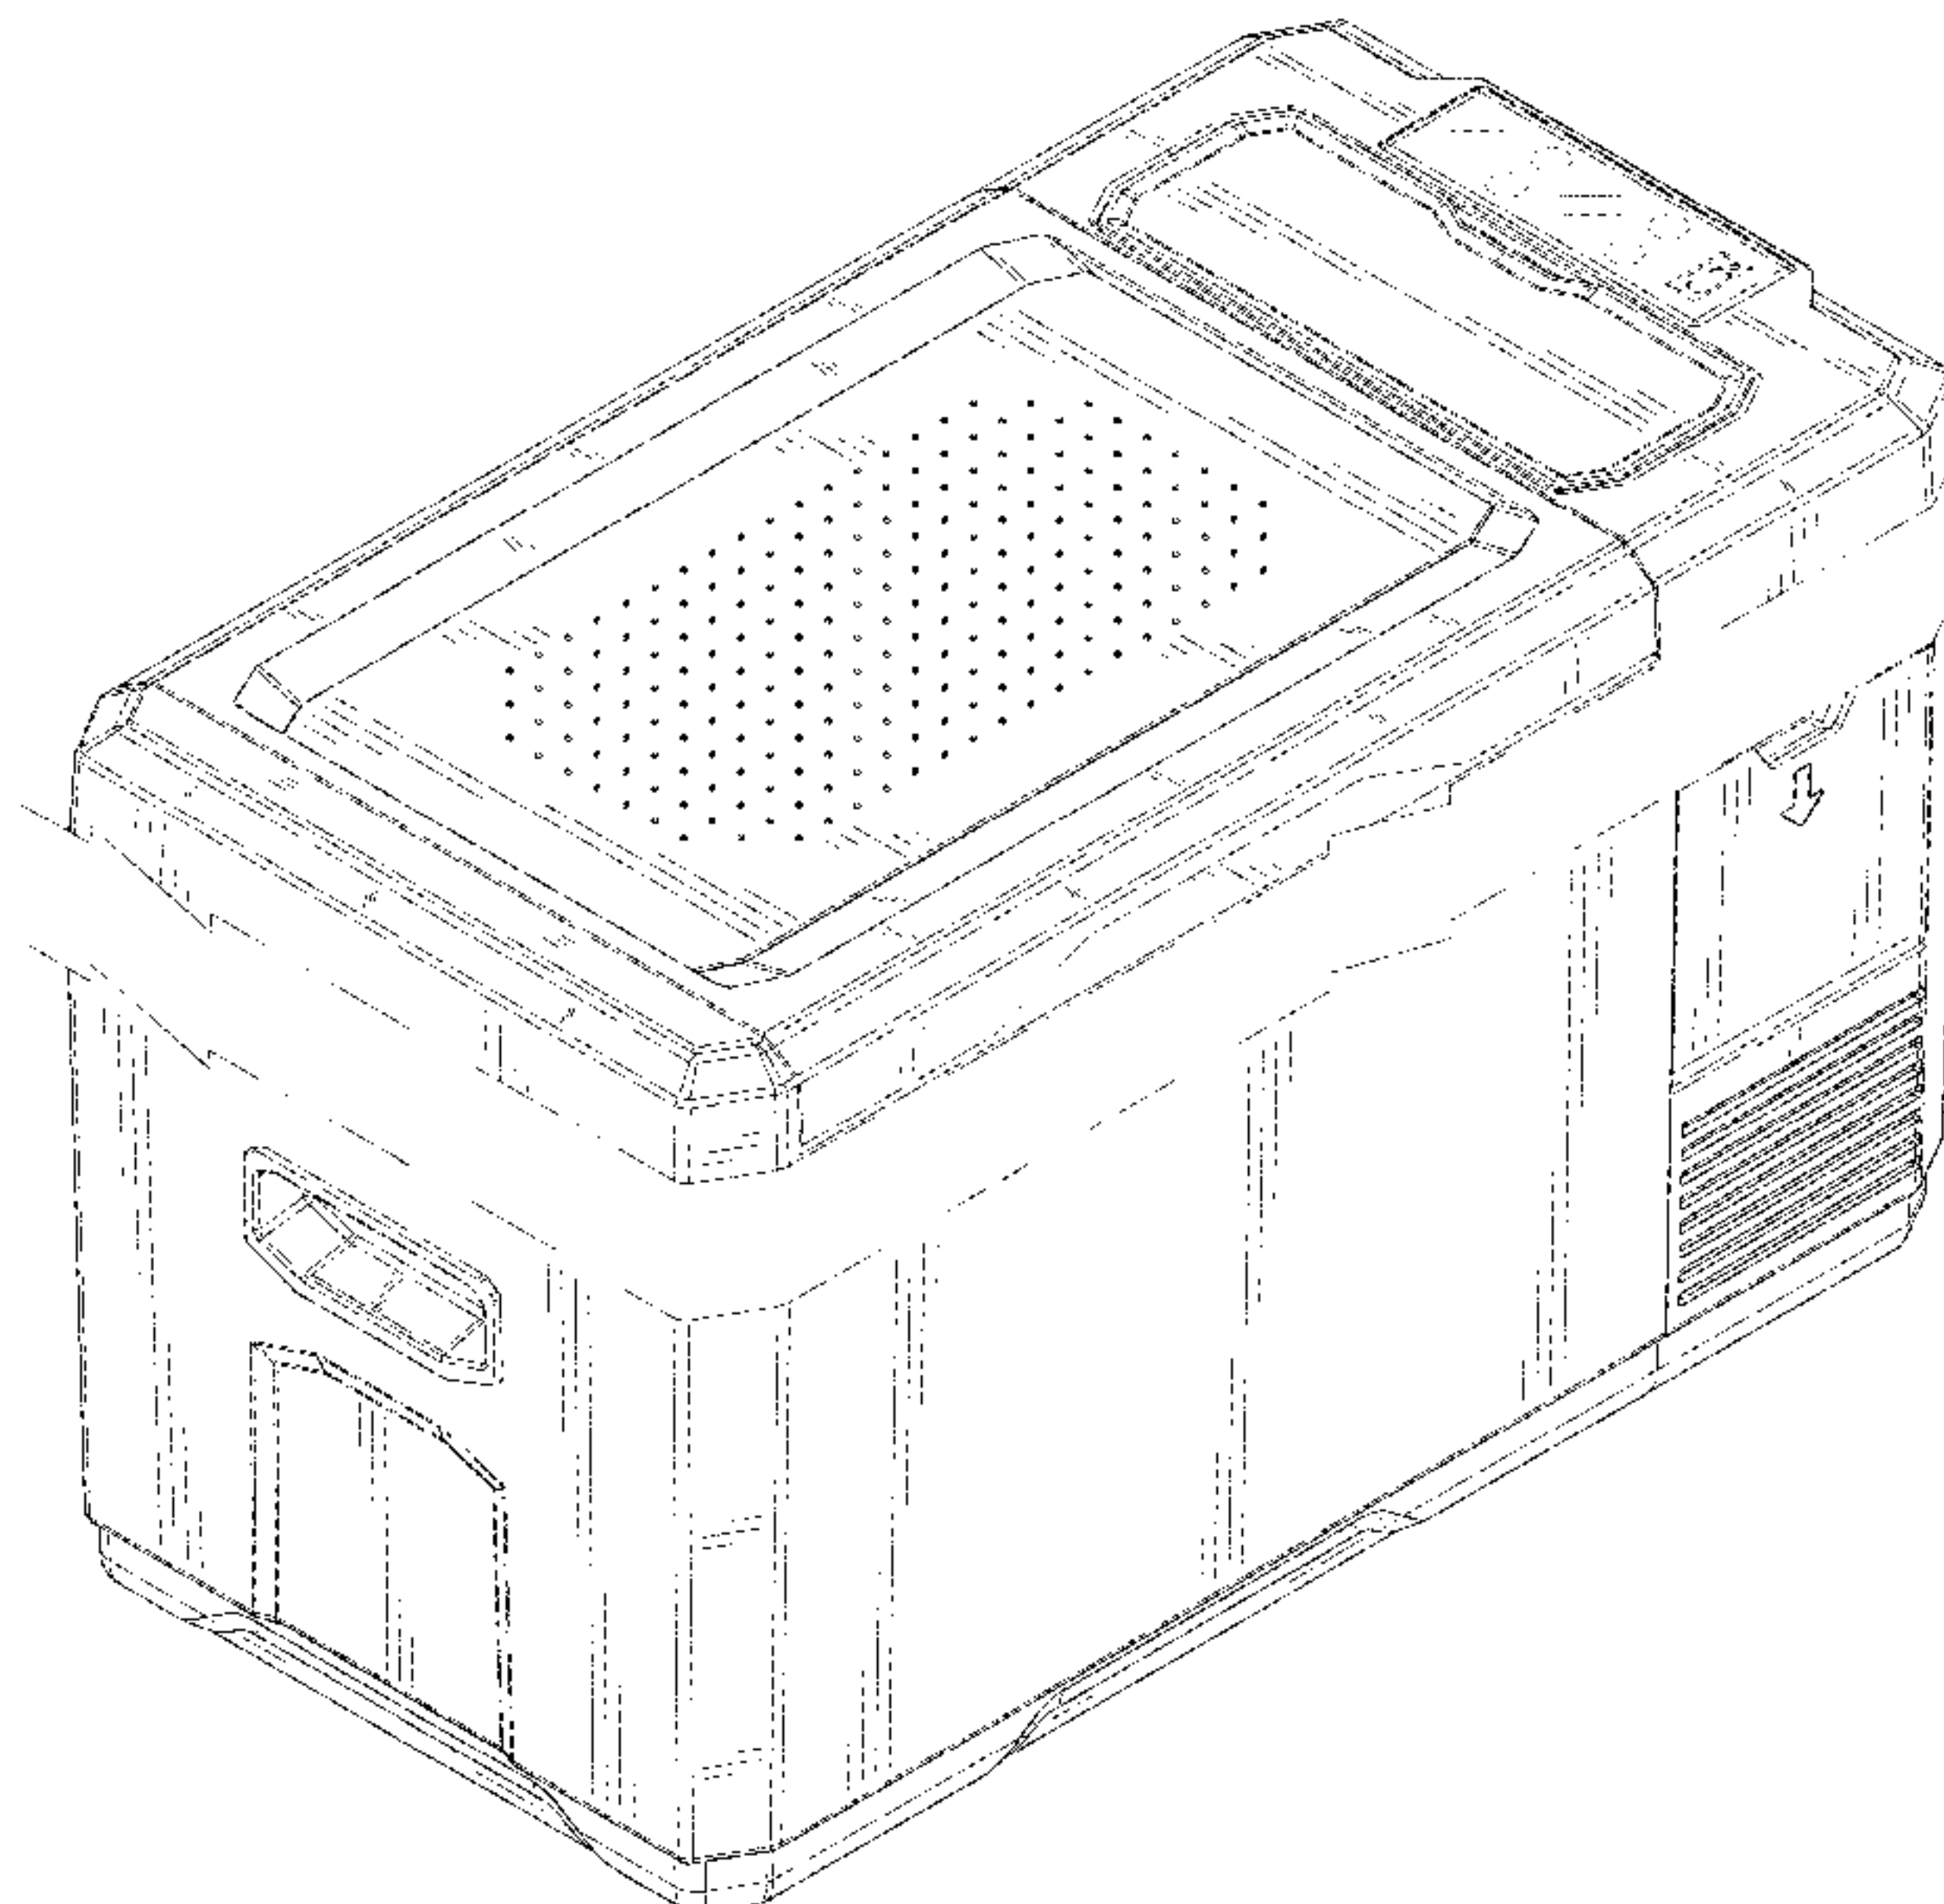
is a perspective view thereof, showing the cup holder cover in an open position;
